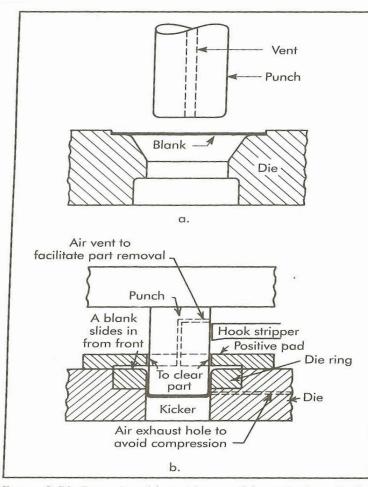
Draw dies: (a) simple type; (b) simple draw die for heavy stock.
